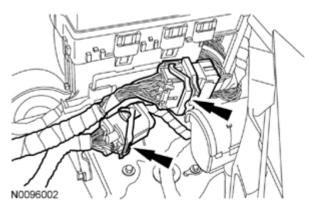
Locating Engine Harness Electrical Connector Courtesy of FORD MOTOR CO.
